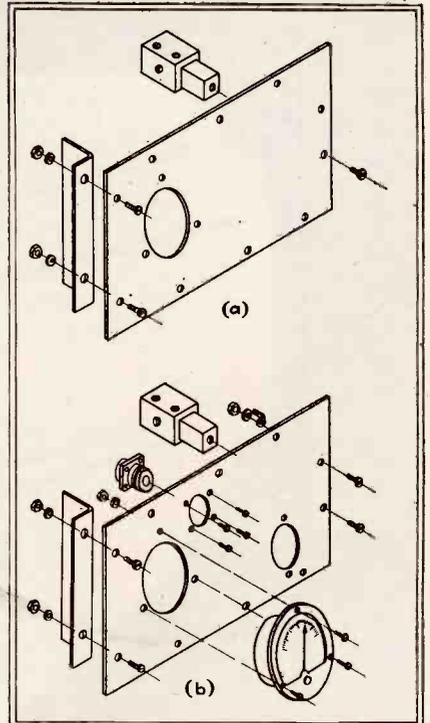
An isometric layout of a complete panel is shown at (b). From this master, the view at (a) of the sub-assembly is drawn
